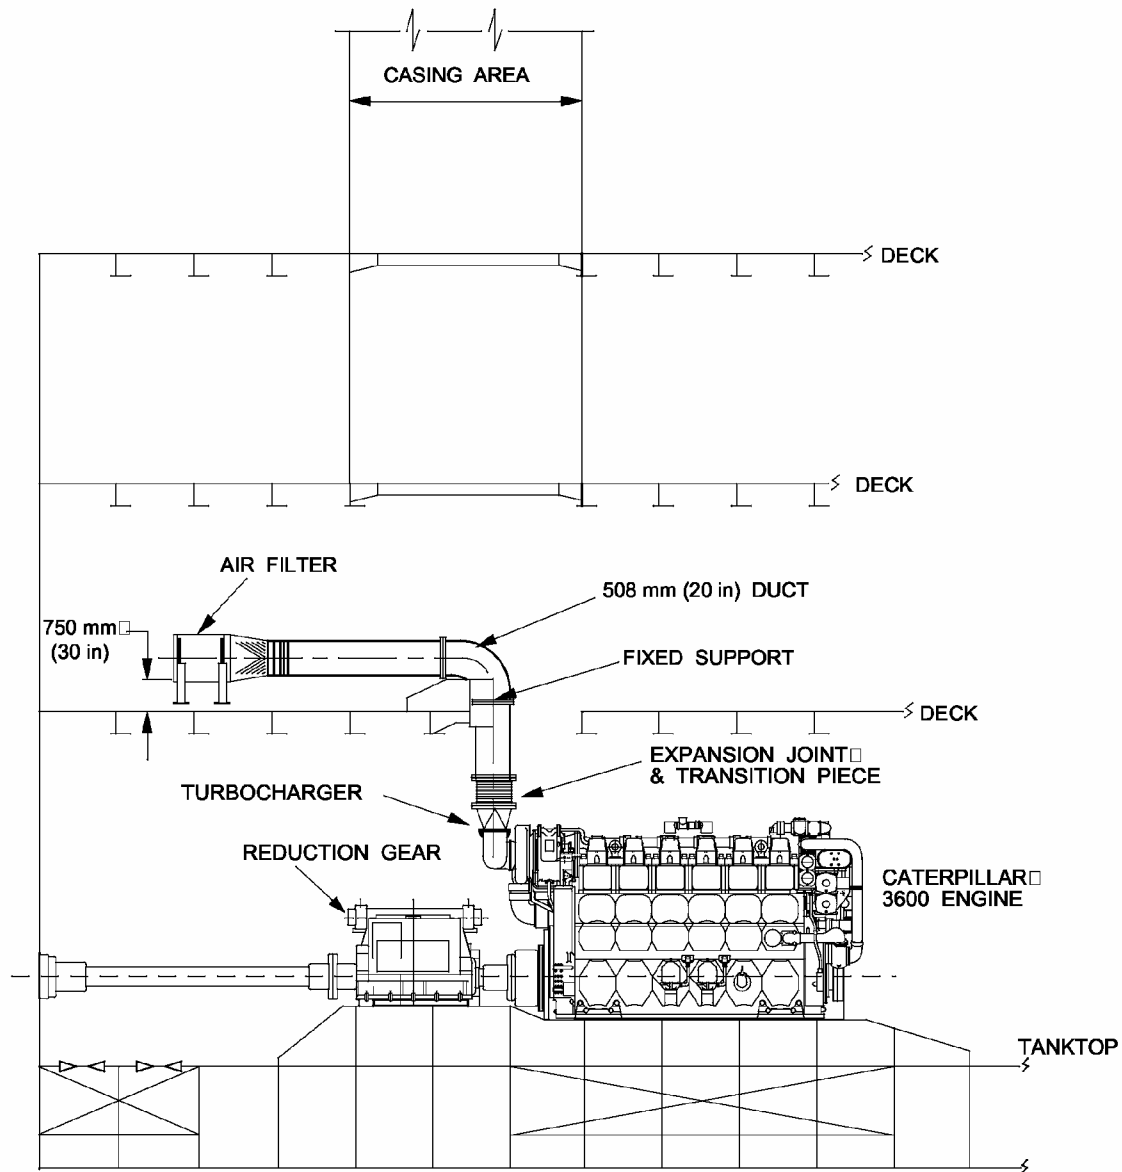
shows a 3600 marine application configured to use a remote mounted air cleaner and engine room air for combustion.
